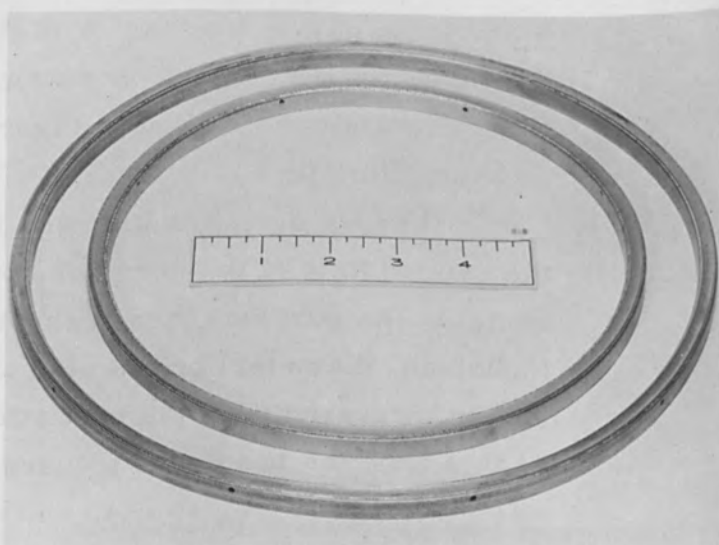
Welded 8- and 10-in.-diameter ionizers
